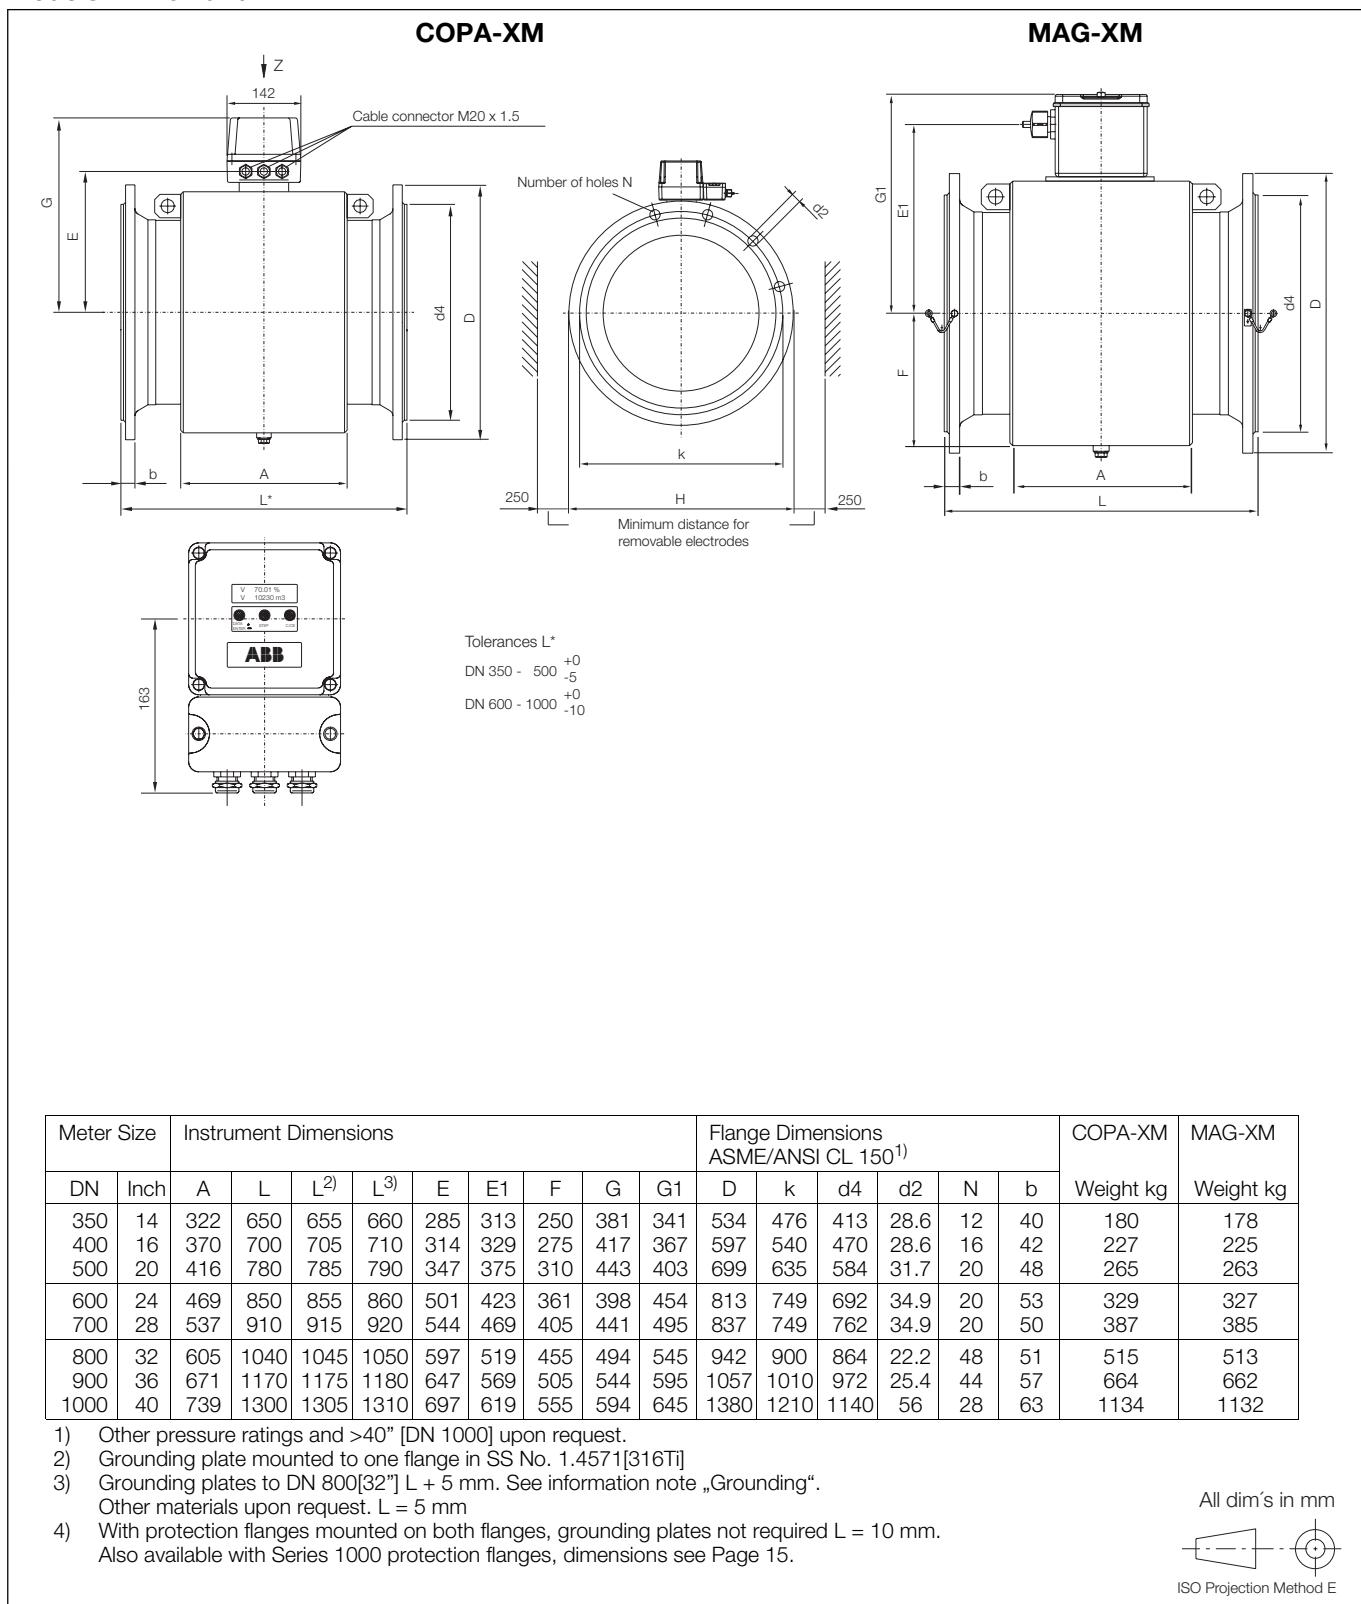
Flowmeter Primaries 14" to 40" [DN 350 to DN 1000], ASME/ANSI Flanges
